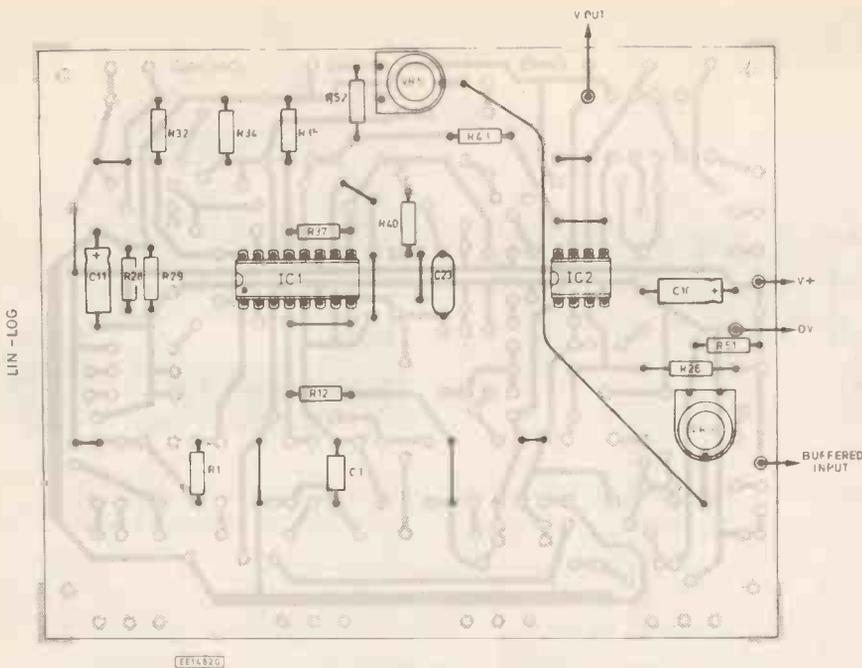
Printed circuit board component layout for the Lin-to-Log Converter - Plan 1. The full size printed circuit copper foil master pattern appeared in Part One (June '88), Fig. 1.1.
